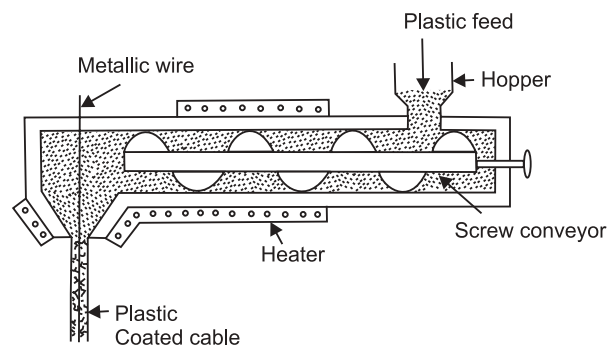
Moulding of Cable by Vertical Extrusion Moulding
